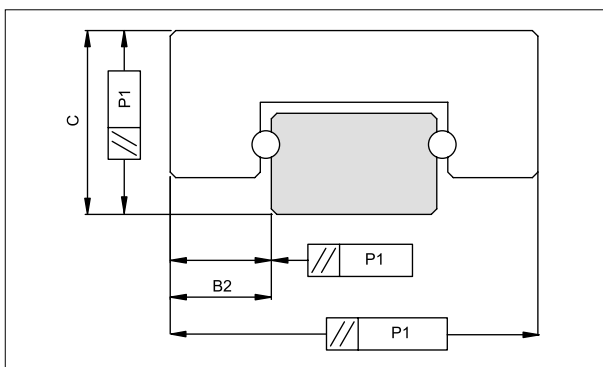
Tolerances DS recirculating assemblies
